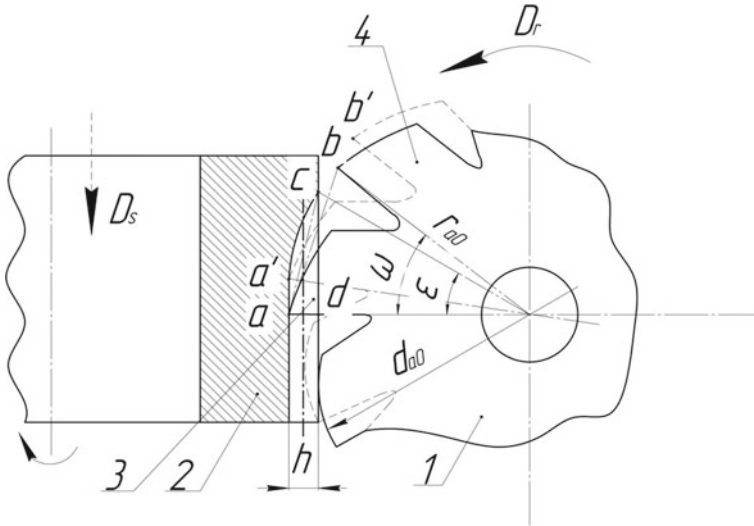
Diagram of milling cylindrical gear wheels with a pulse feed
